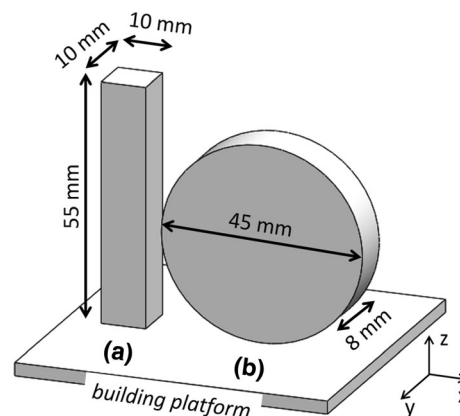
Geometry and dimensions of the samples: (a) parallelepiped and (b) disc
